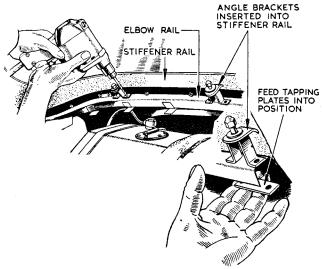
Drilling the Elbow Rail and installing Bridge Pieces.
